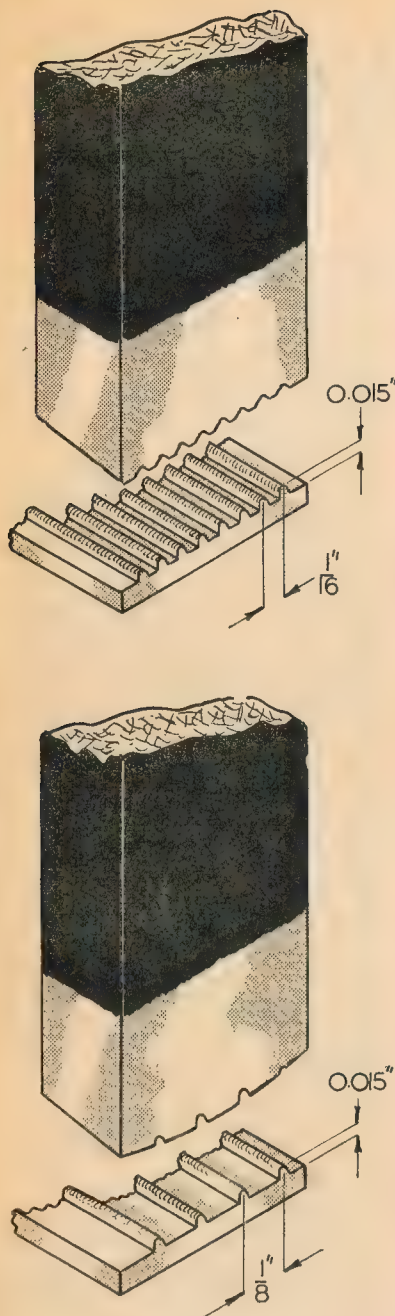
Showing the form of tread-plate cut with chasers of different thread pitches
